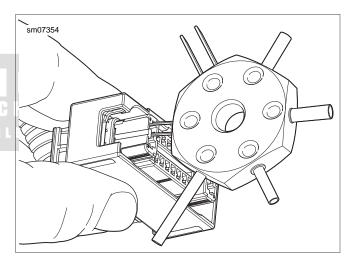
Removing Large Socket Terminals: Tyco MCP Connector
